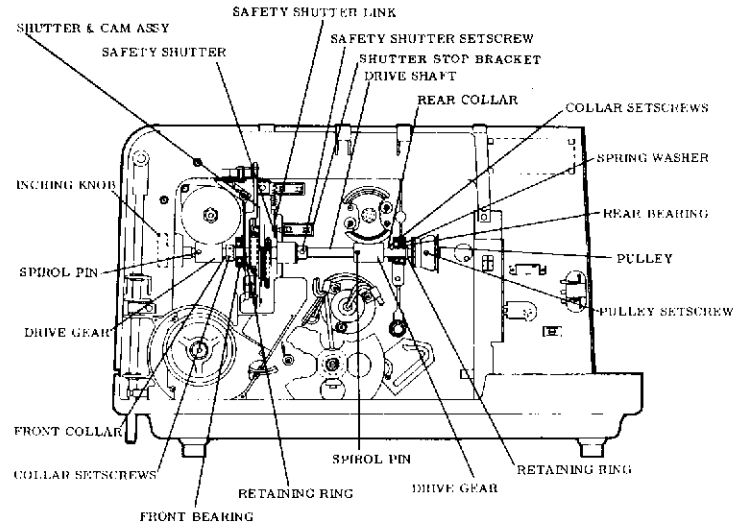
DISASSEMBLY AND REASSEMBLY
